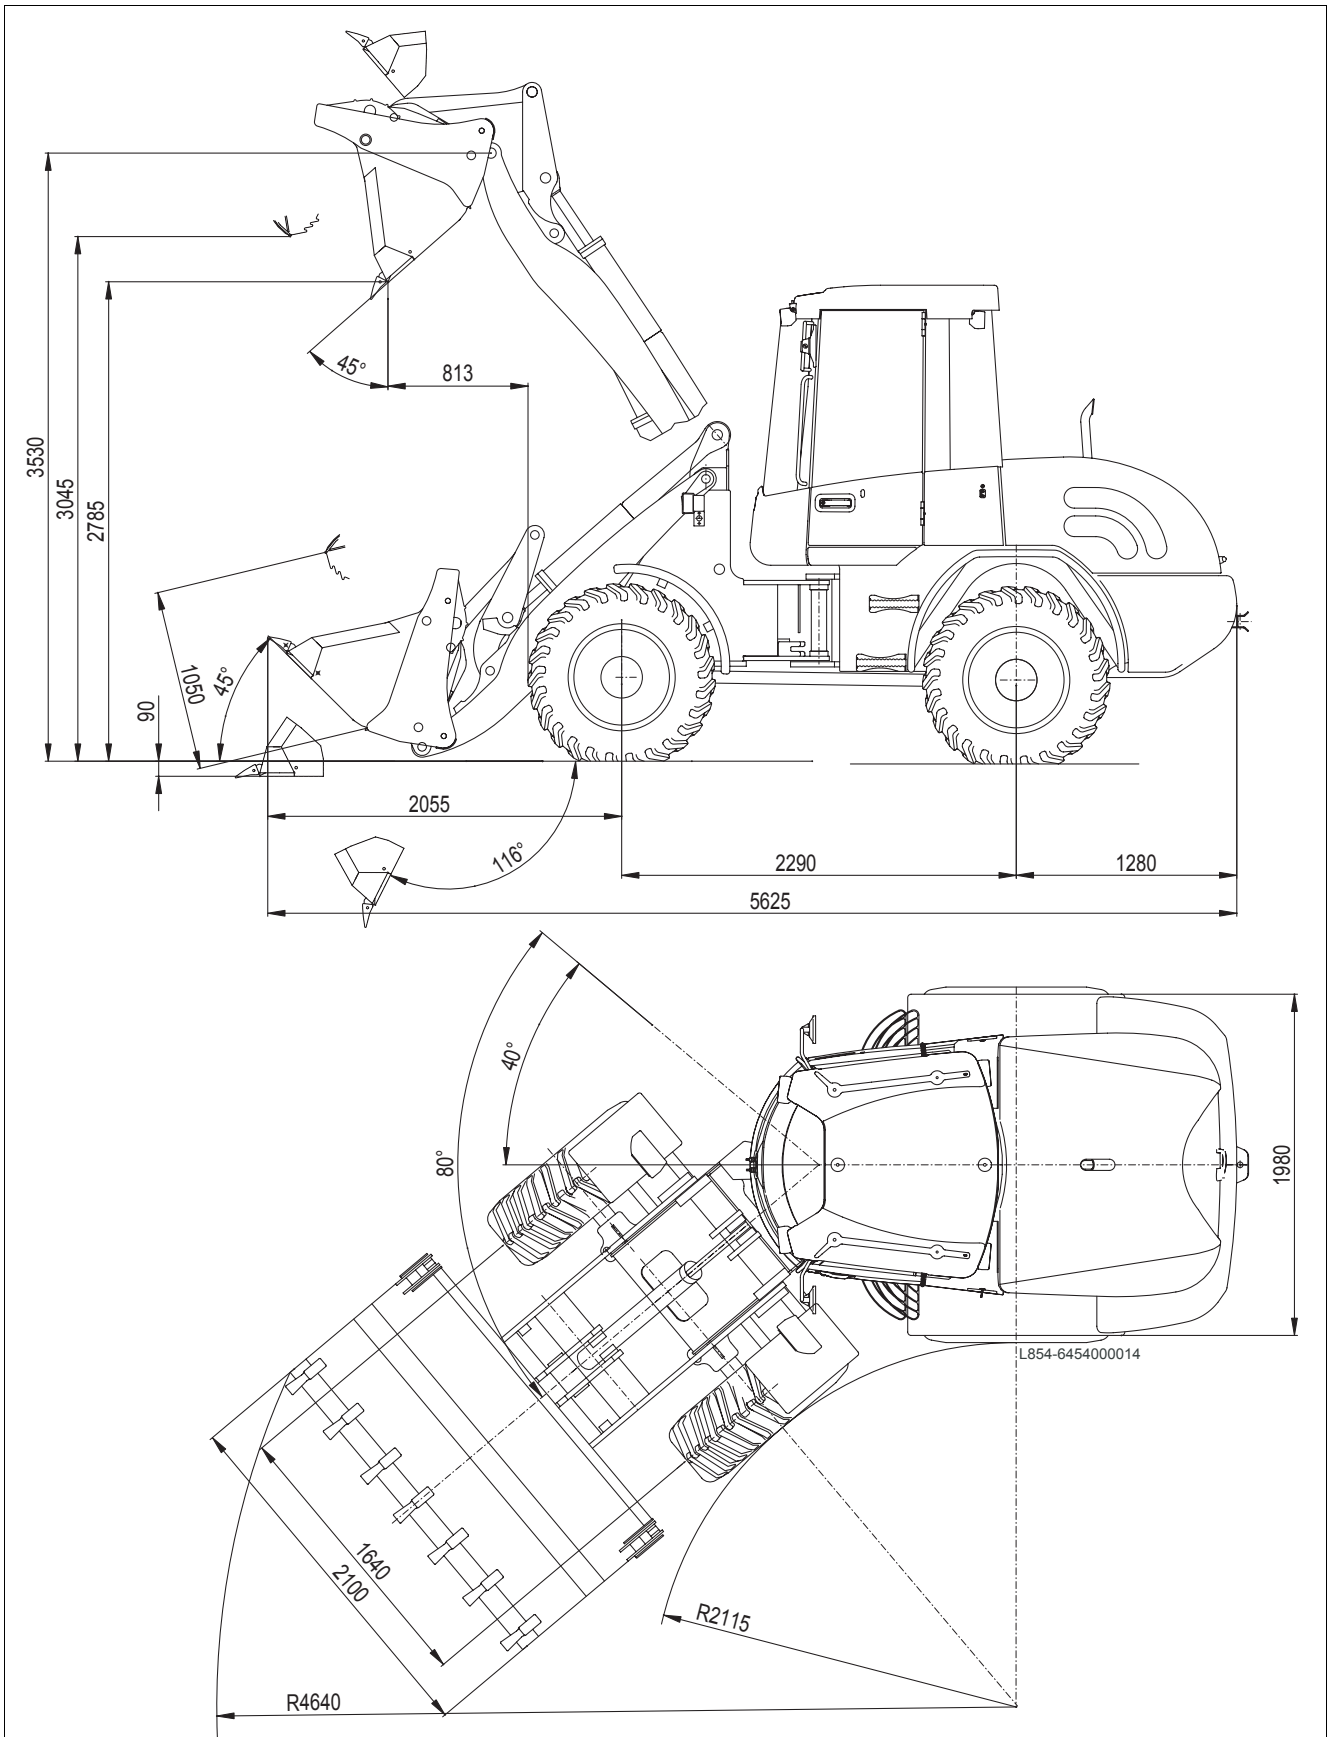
Dimensioned drawing with multi-purpose bucket and 405/70 R 20 tires
